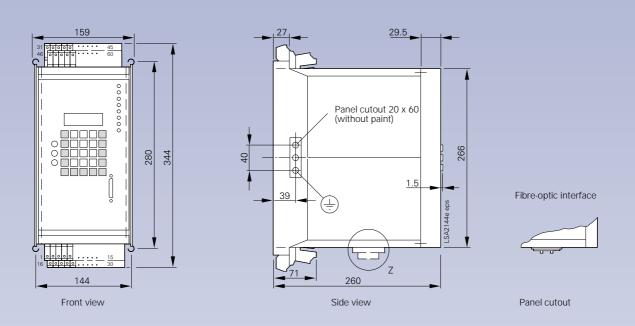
SIPROTEC 7SA510 distance protection relay with 7XP2030-1 housing (for panel surface mounting)
